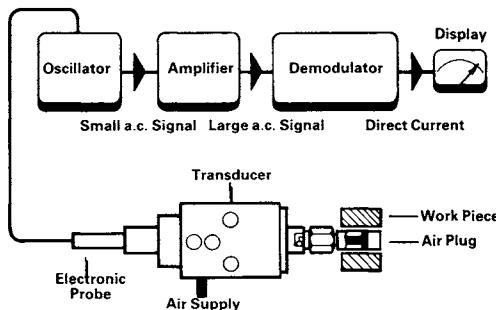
Mechanical contact air gauging. The air plug has tungsten carbide pads mounted on reed springs. (*Mercer Brown & Sharpe*)
